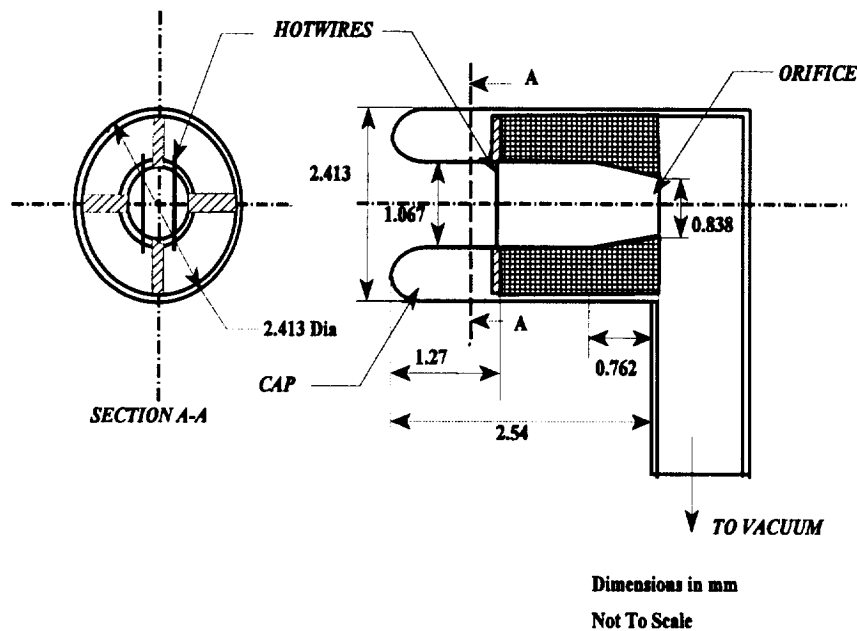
Scaled Drawing of the Aspirating Probe Geometry
